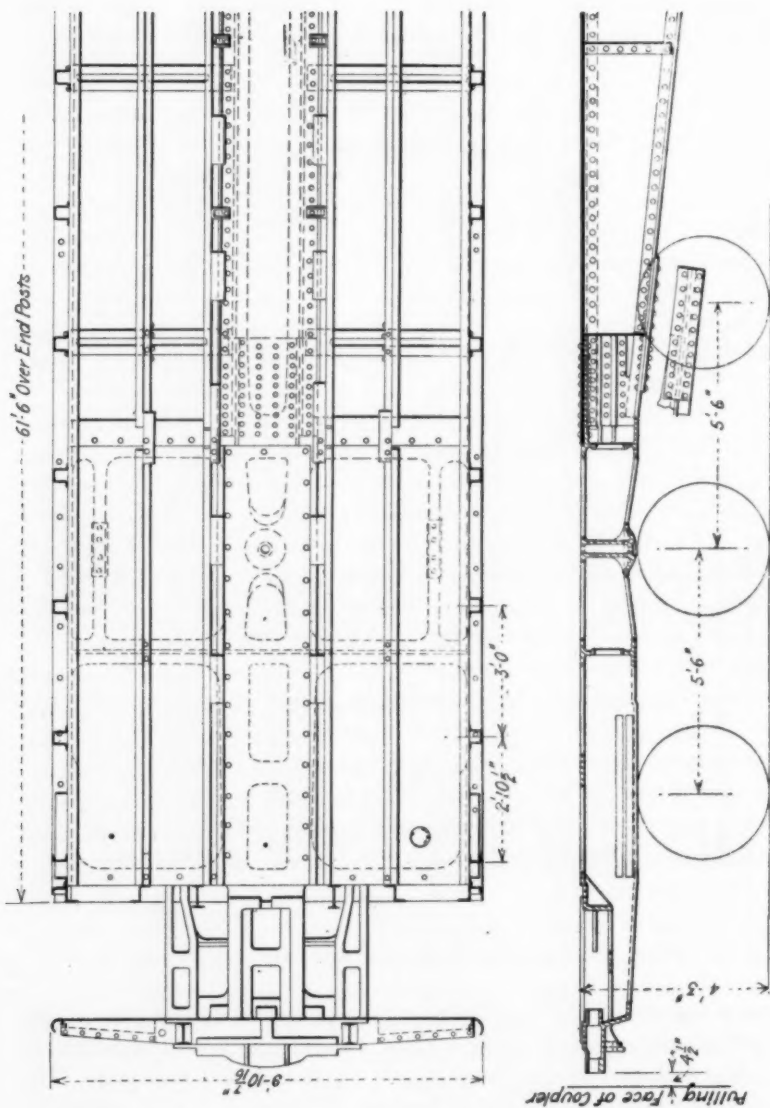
STEEL CAR TYPE, CENTER SILLS CONNECT AT BOLSTER WITH A STEEL CASTING
